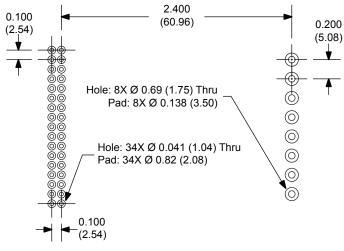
IMx-34P1-8P2 PCB Hole Pattern
